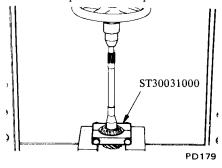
Removing Pinion Rear Bearing Inner Race
